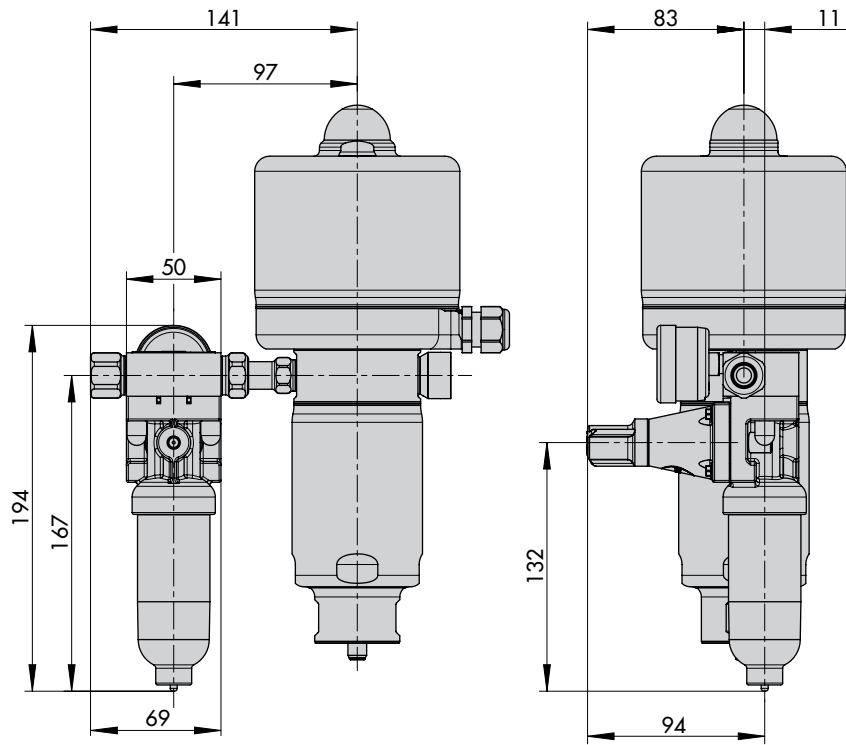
Type 4708-65xx Supply Pressure Regulator for Type 3379 Pneumatic Actuator (31 cm²)
